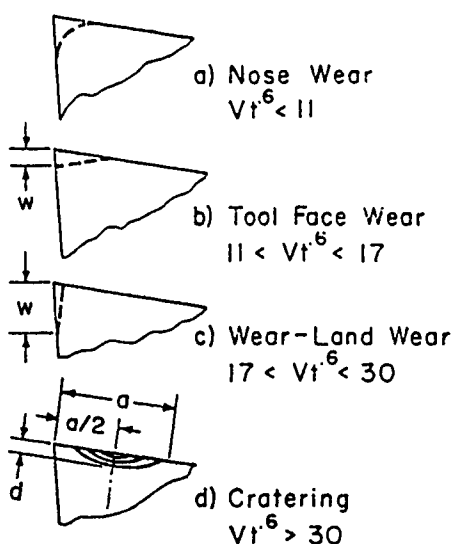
Types of tool wear for AISI 1045 steel as influenced by cutting speed (V) and feed (t) in a single point turning operation with a tungsten carbide tool. w = wear land, d = crater depth, a = chip-tool contact length. Depth of cut, 0.08 in. (Opitz,⁽¹⁴⁾).
